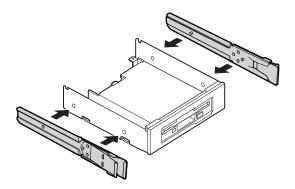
Installing Slides on 3.5-inch Floppy Drive
